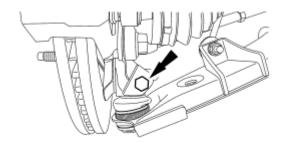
Locating RH Front Halfshaft Nut Courtesy of FORD MOTOR CO.
